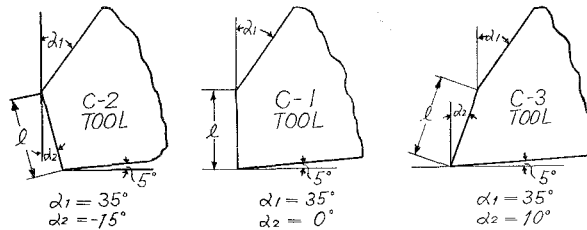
Profiles of restricted contact tool in plane, perpendicular to cutting edge.
